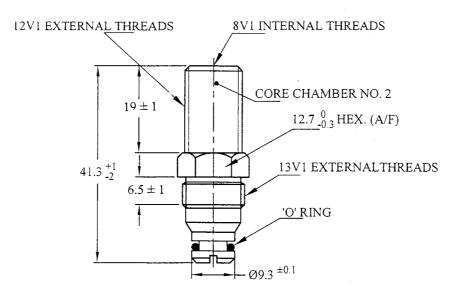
Large Bore Screw-on Tube Valves — Assembly
